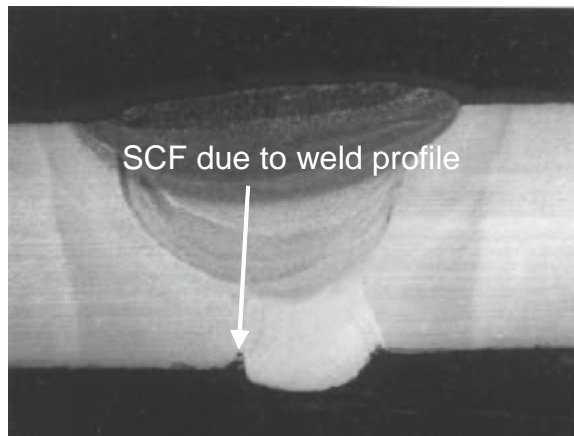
Photograph demonstrating SCF-producing weld profile
